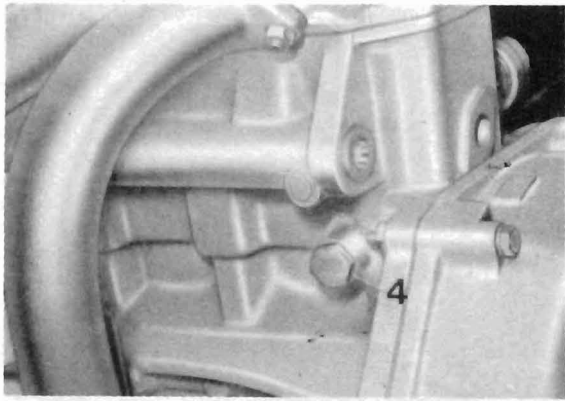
Cylinder block coolant drain plug (4) (Sec 11)
